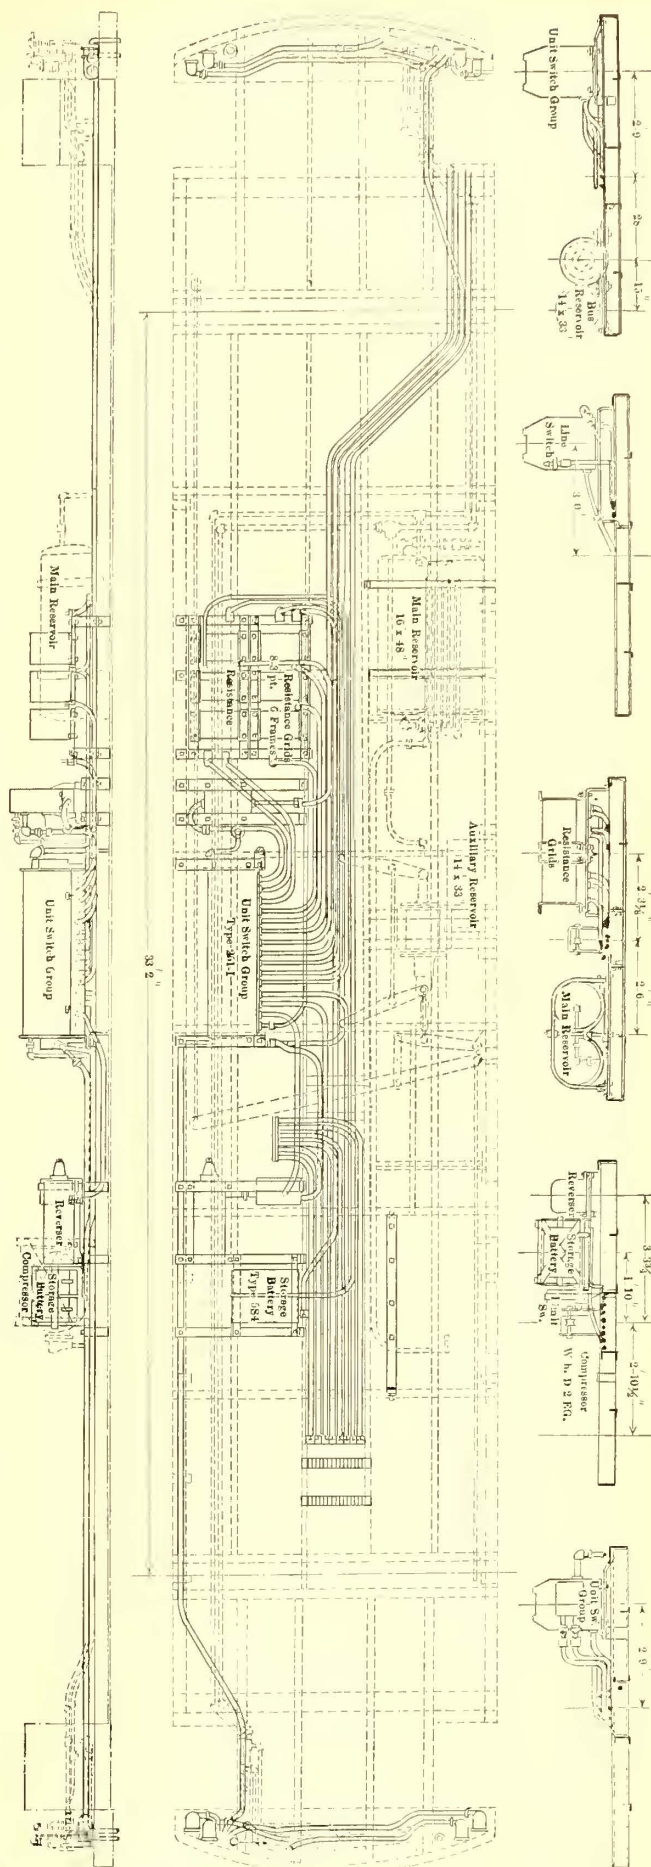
Brooklyn Power Equipment—Conduit, Control and Brake Apparatus on Elevated Car
